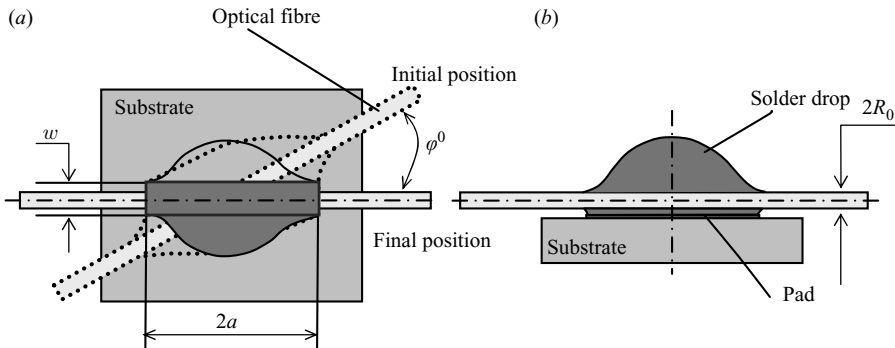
Illustration of the mechanism of the self-assembly of optical fibre by using a solder drop positioned on a rectangular horizontal wettable pad attached to a substrate. The fibre is submerged in the solder and initially misoriented at an angle φ^0 relative to the pad long centreline. At the end of the self-assembly process, the fibre should be aligned with the pad centreline, while the solder wets the entire pad and part of the fibre (the wettable area). (a) Top view, and (b) side view. The wettable pad dimensions are $w \times 2a$, and the fibre cross-sectional radius is R_0 .
